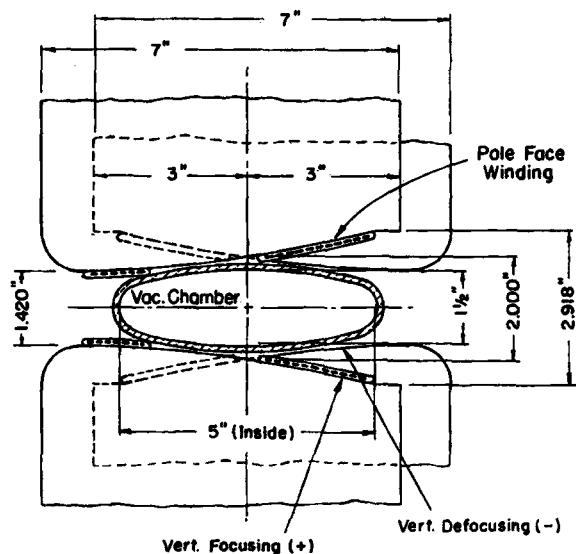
Model pole face shape, vacuum chamber and pole-face windings.
